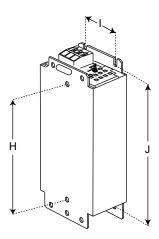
Mounting dimensions of line reactor, frame size FSA
